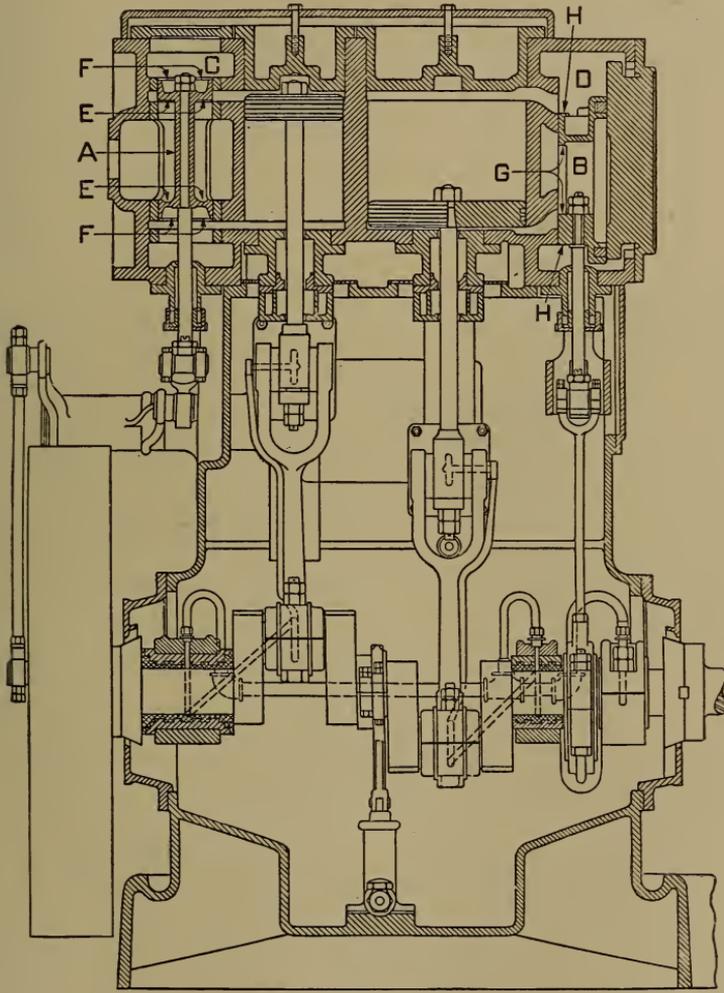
Vertical Section of Engine. Form H-1. Gen. Elec. Co.
